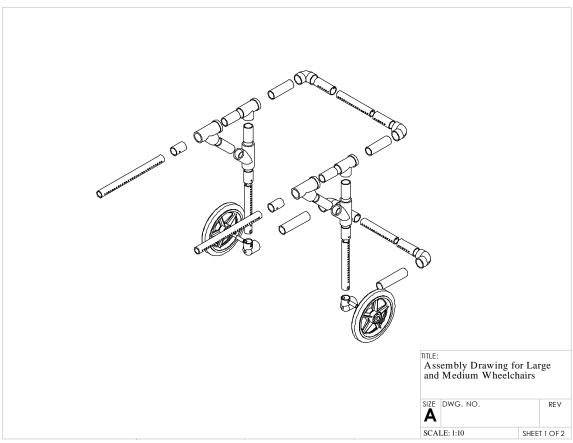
Exploded View of the Medium Wheelchair Assembly.
